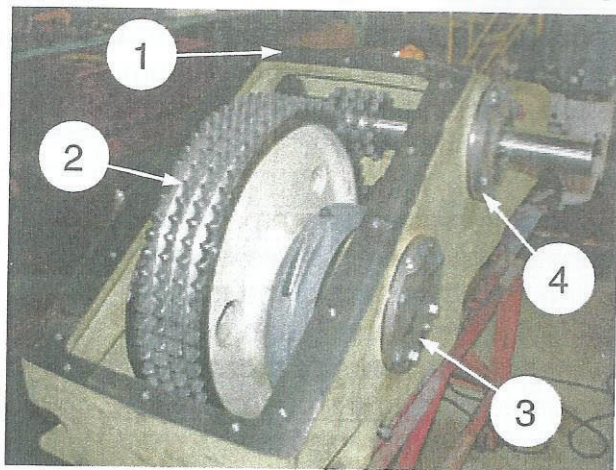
Preparation for removing the eccentric sprocket. The cover [not shown] is held in place by bolts at point [1]. The chain is disconnected at a cotter pin type connector link. To remove the eccentric sprocket [2], remove the bolts and retainer plates [3]. Remove the jackshaft bearing retainer [4] to remove the jackshaft.
